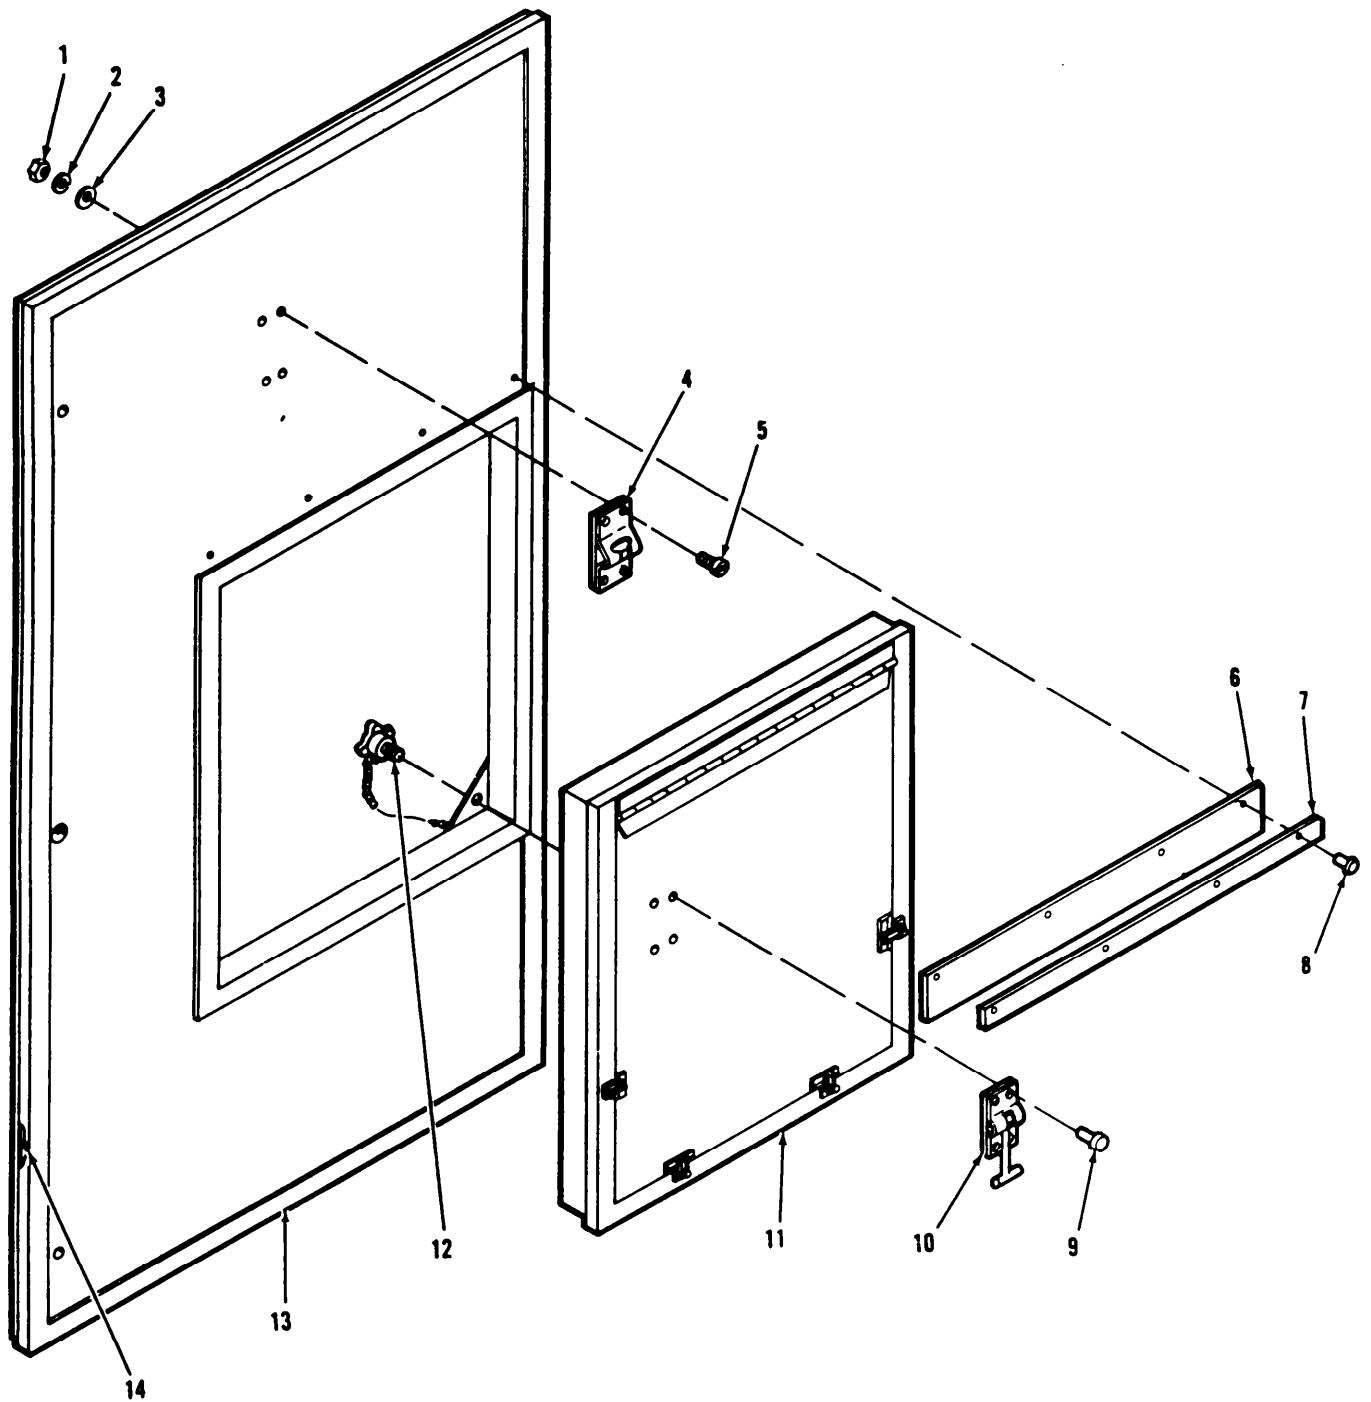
Shelter, Electrical Equipment S-280C/G (Sheet 1 of 2)
